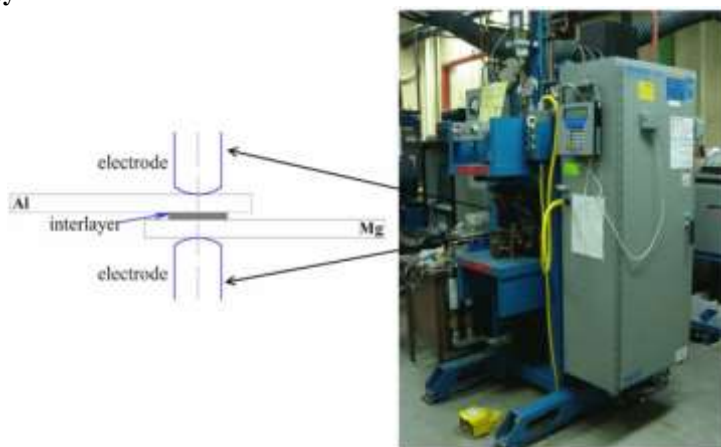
RSW machine and a schematic of the fastening coupons being joined
